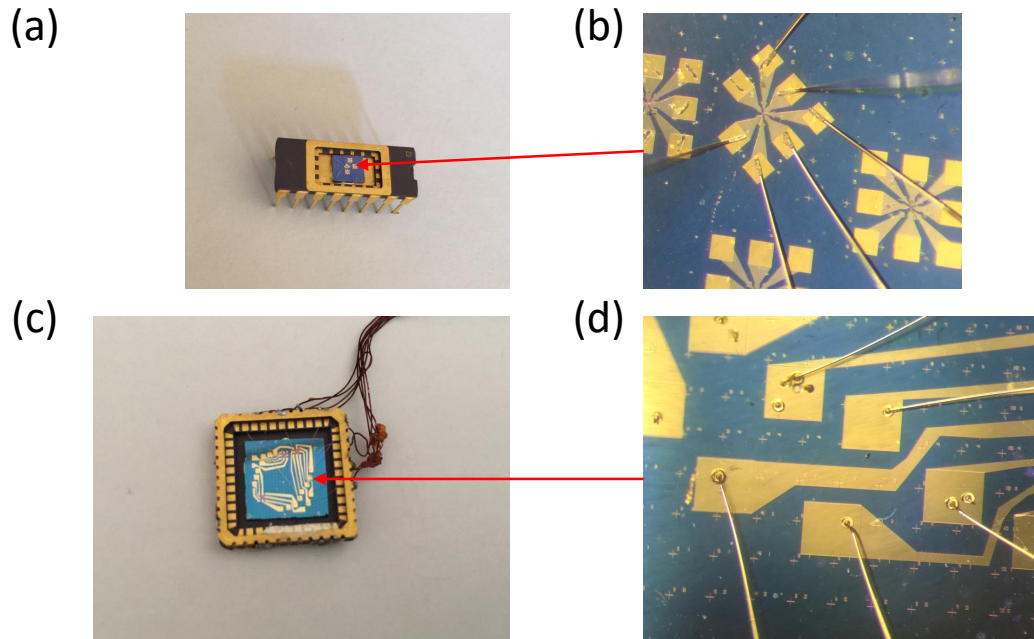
(a),(b) A $4 \times 5 \text{ mm}^2$ chip mounted onto a 16-lead chip carrier. The contacts on this chip are wire bonded to the chip carrier by a wedge bonder using aluminium wires. (c),(d) A $10 \times 10 \text{ mm}^2$ chip mounted onto a 44-leadless chip carrier with enamelled copper wires soldered onto the outside of the chip carrier. In this example, the contacts on this chip are wire bonded to the chip carrier by a ball bonder using gold wires.
